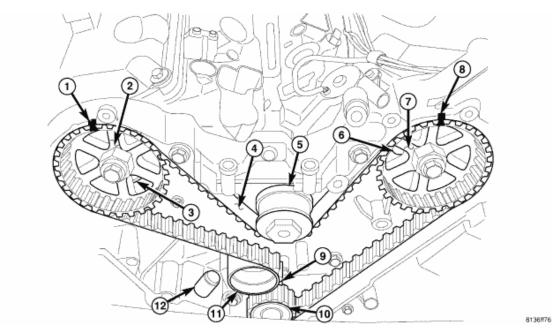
Identifying Timing Gear Components Courtesy of CHRYSLER LLC
